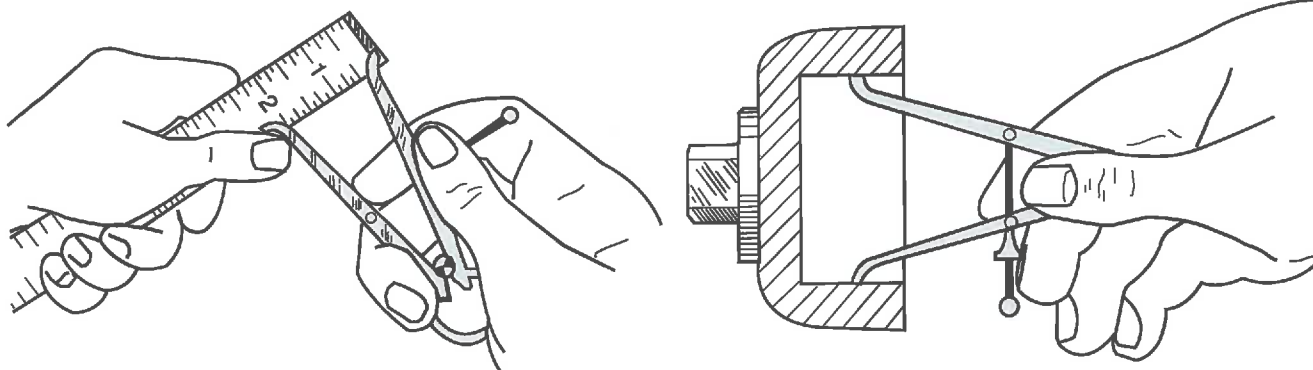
The inside caliper is set and used to check dimensions on the inside of round material. (The L.S. Starrett Co.)
